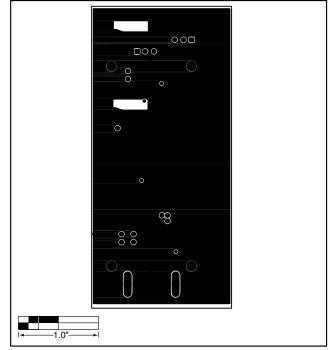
MAX3665 EV Kit PC Board Layout—Ground Plane
